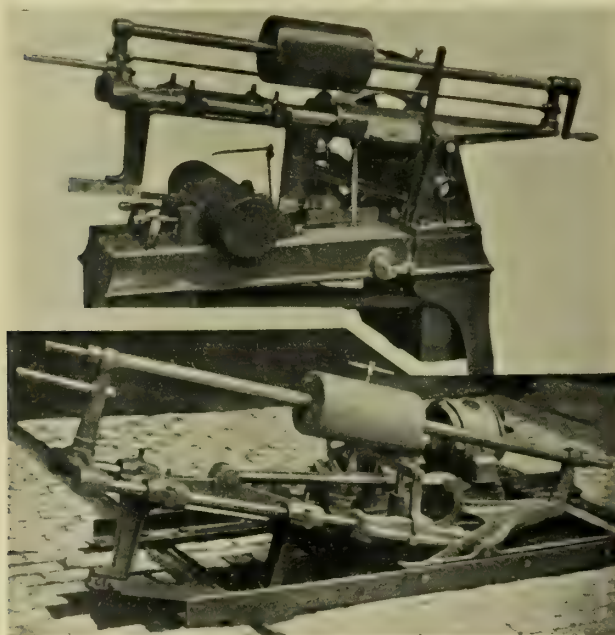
SINGLE SAWING MACHINE FOR CUTTING TRAMWAY RAILS.
